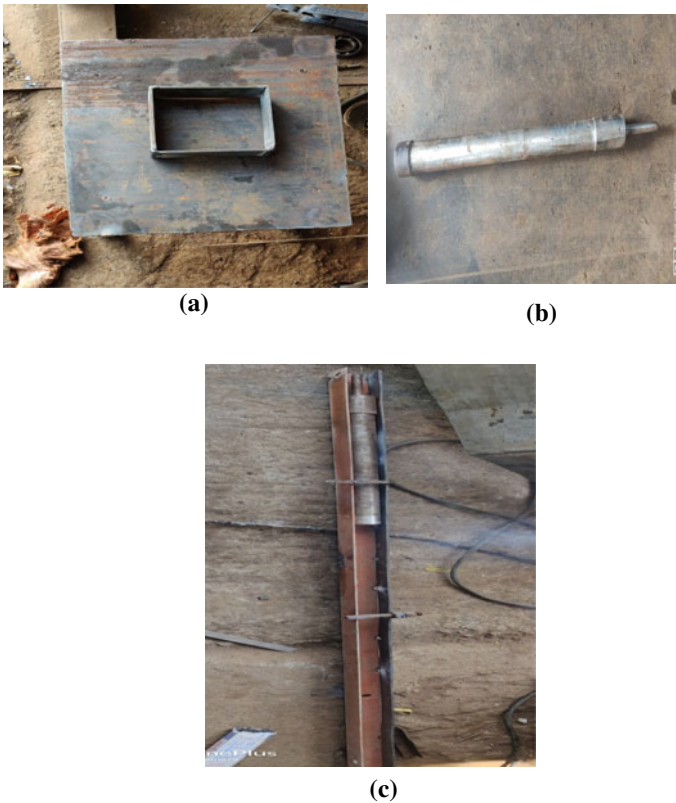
a Bottom specimen supporting structure, b impactor, c frame to guide of impactor
